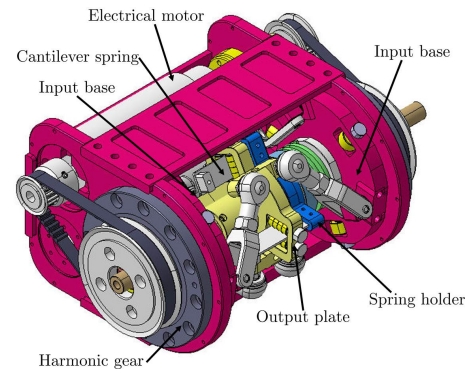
Designed MASA. It is actuated by two identical electrical motor and harmonic gears.
